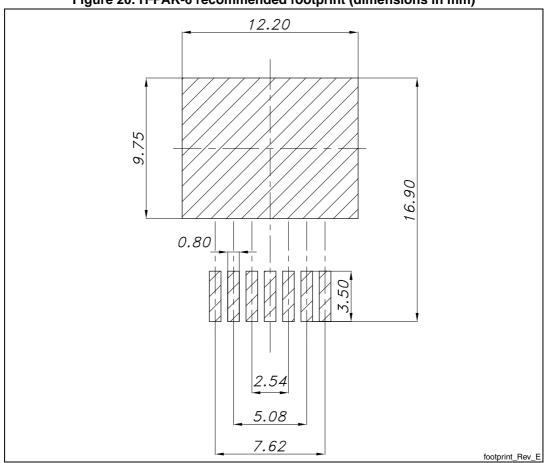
H²PAK-6 recommended footprint (dimensions in mm)
